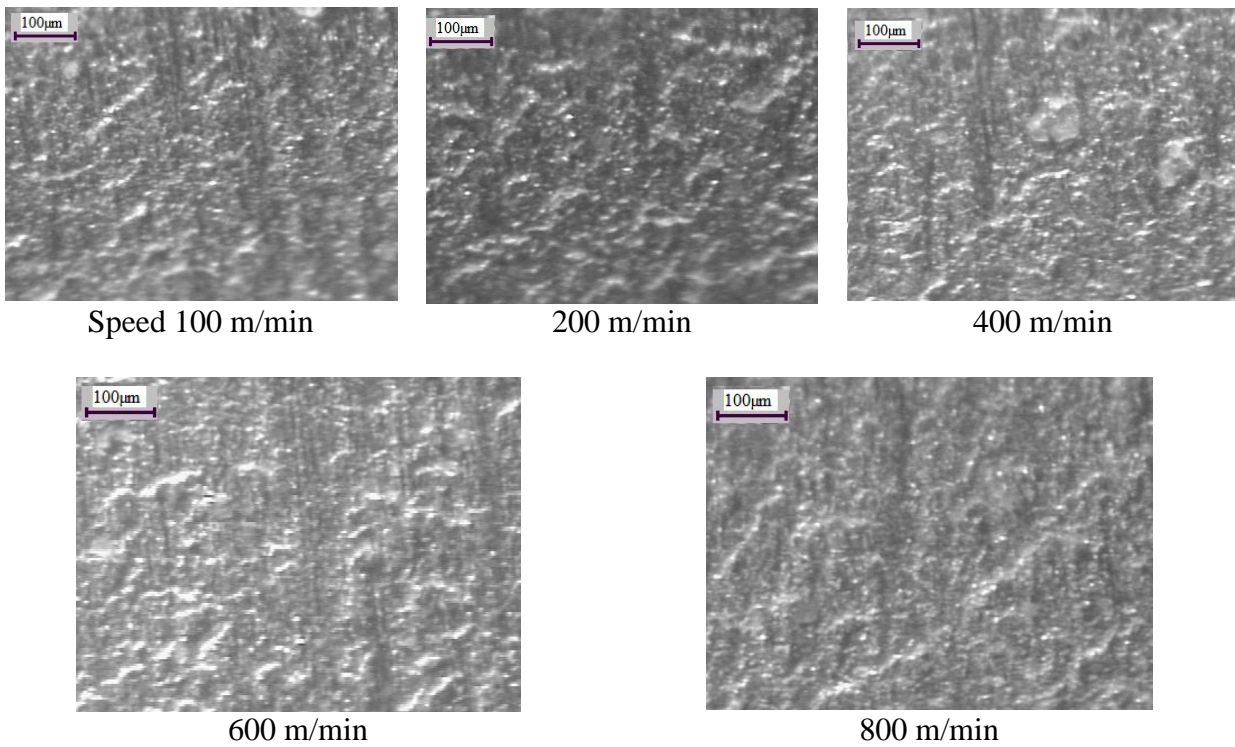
Machined surface of the MMC at different speeds (at feed 0.1 mm/rev, depth of cut 1 mm)
